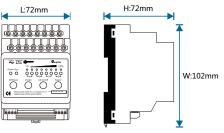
Dimensional Drawing - Front View Figure 3. Dimensional Drawing - Sideview
